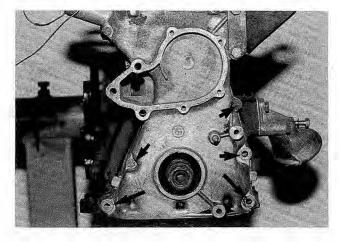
Lower timing chain cover mounting bolts (arrows).
